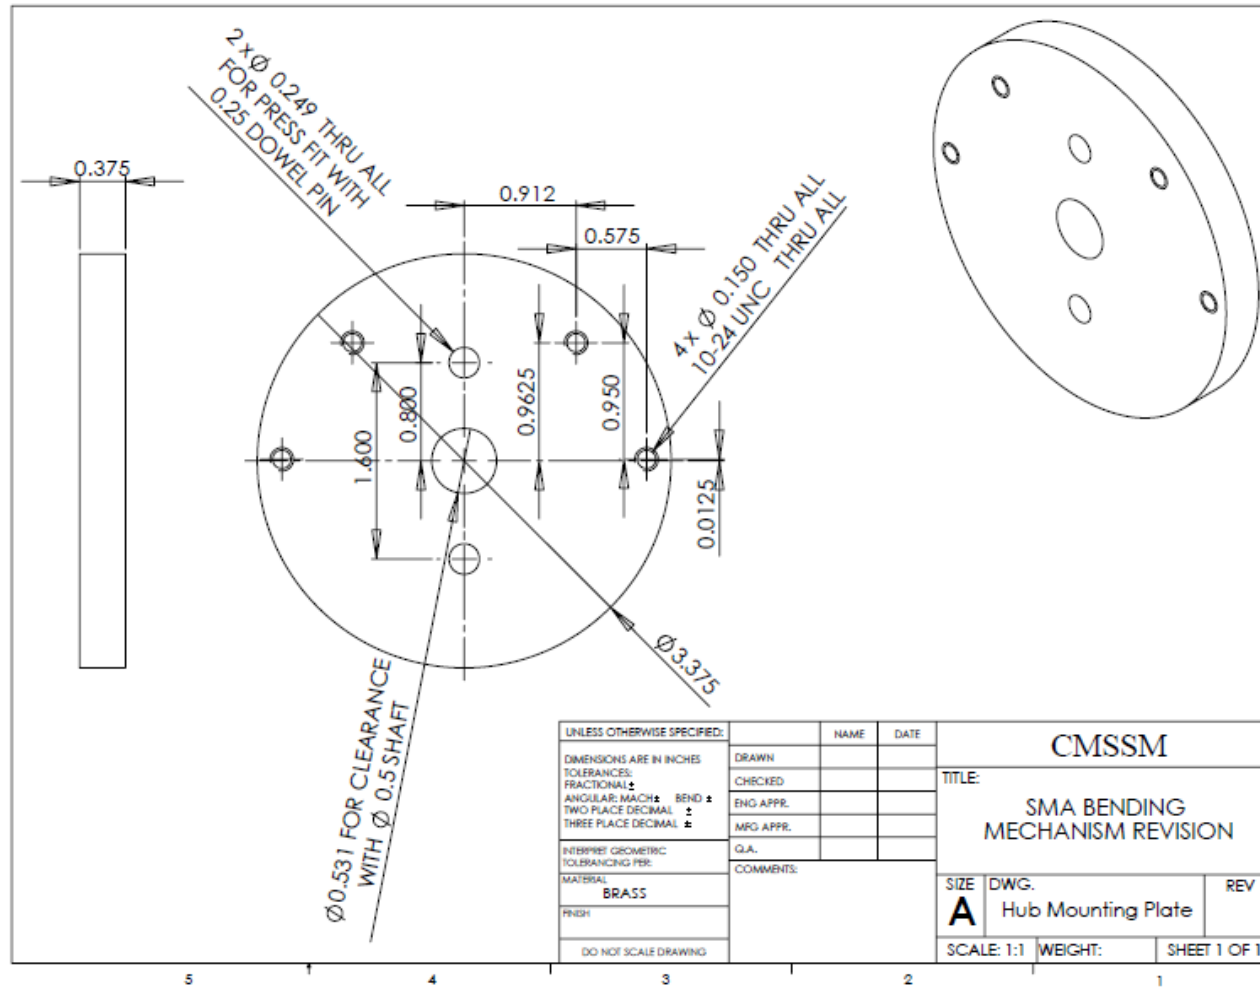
Drawing of hub sprocket plate where pillow blocks housing the linear bushings are mounted.
